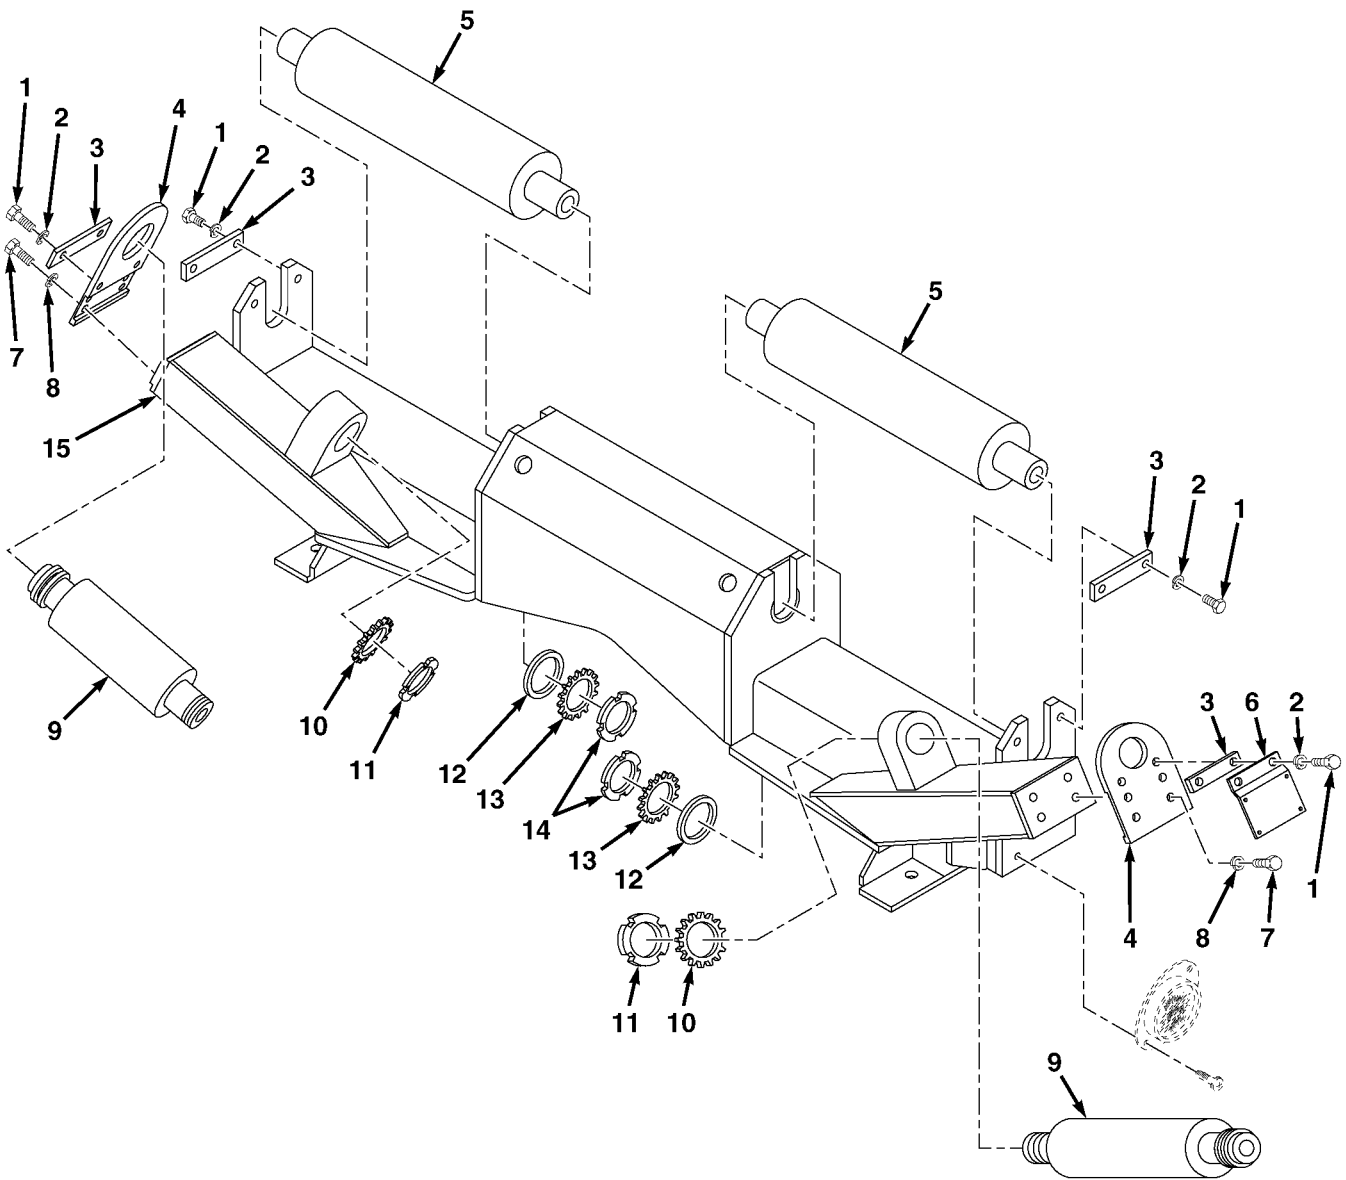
LHS ROLLER AND ROLLER MOUNTING BRACKET
